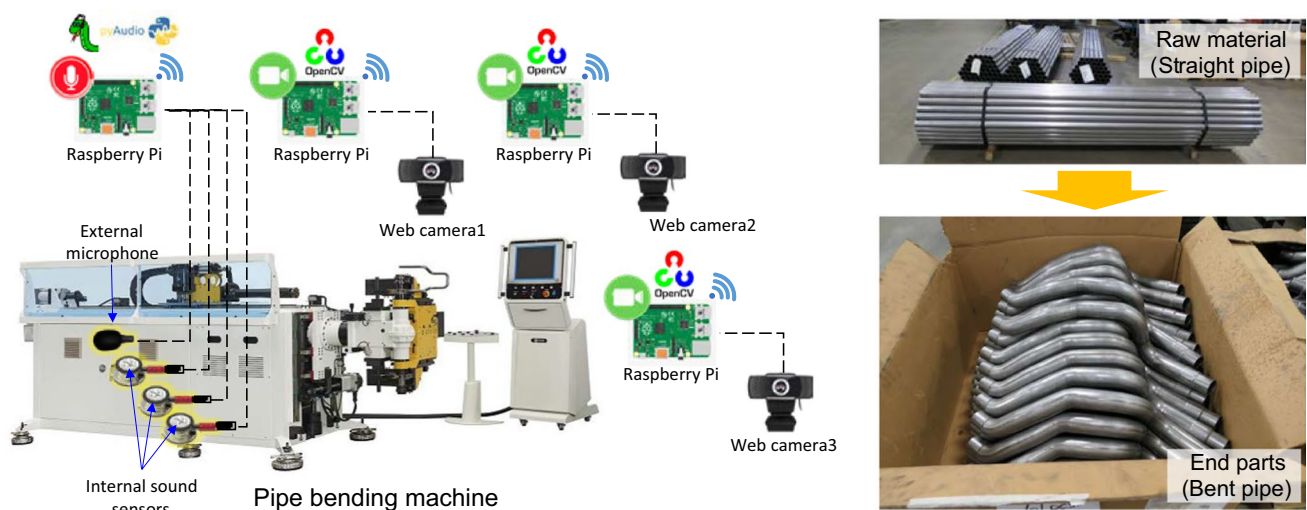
Outline of pipe bending machine monitoring system (left) and raw material and end part (right)
